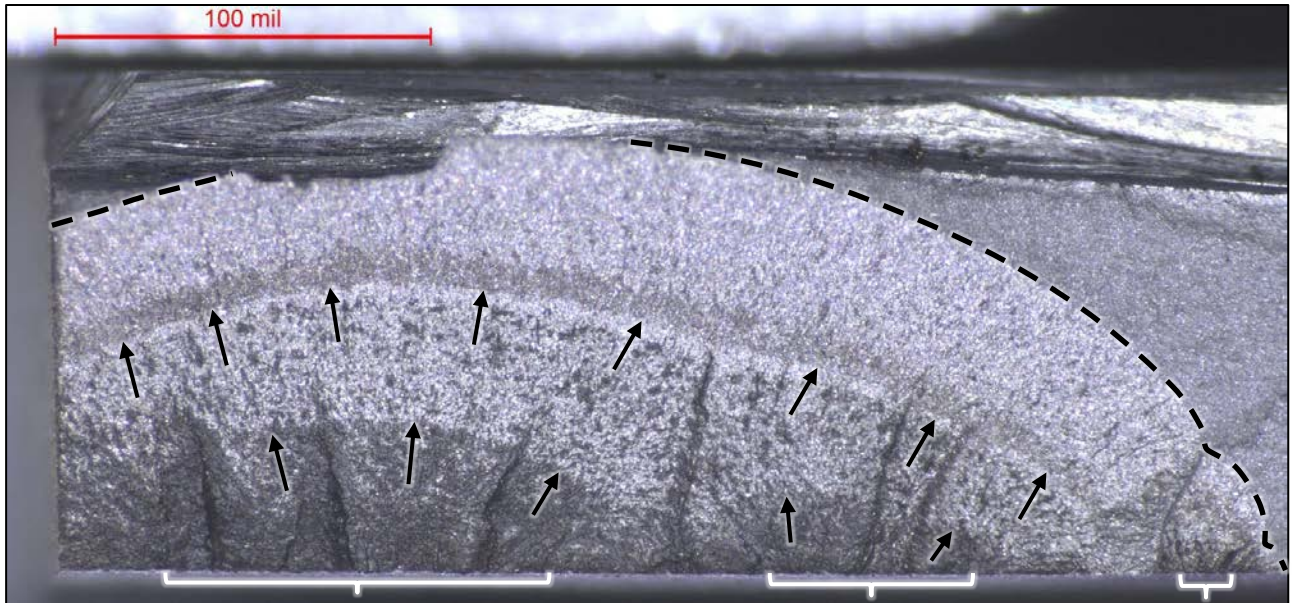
Overall view of the crack fracture surface of blade M after opening by lab fracture. Dashed lines indicate the crack boundary. Unlabeled brackets and arrows indicate the location of fatigue origins and crack arrest lines, respectively. Photo courtesy of GE Aviation.
